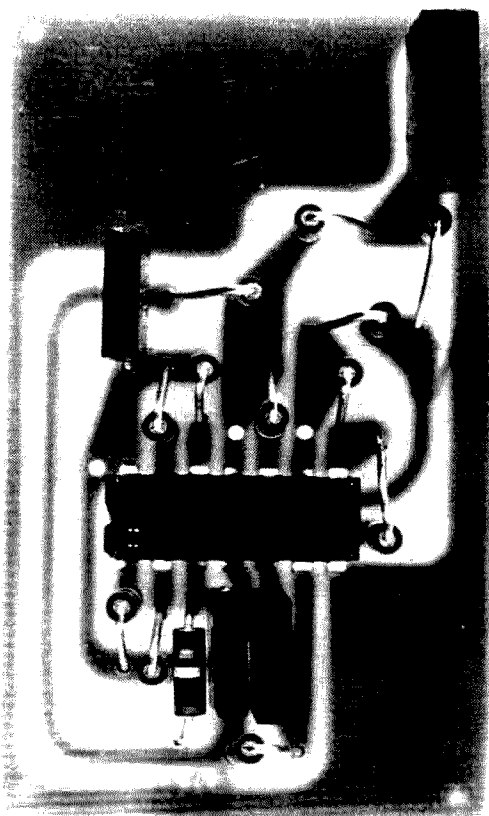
Full size pc board layout (foil side) for the peak/notch filter.
